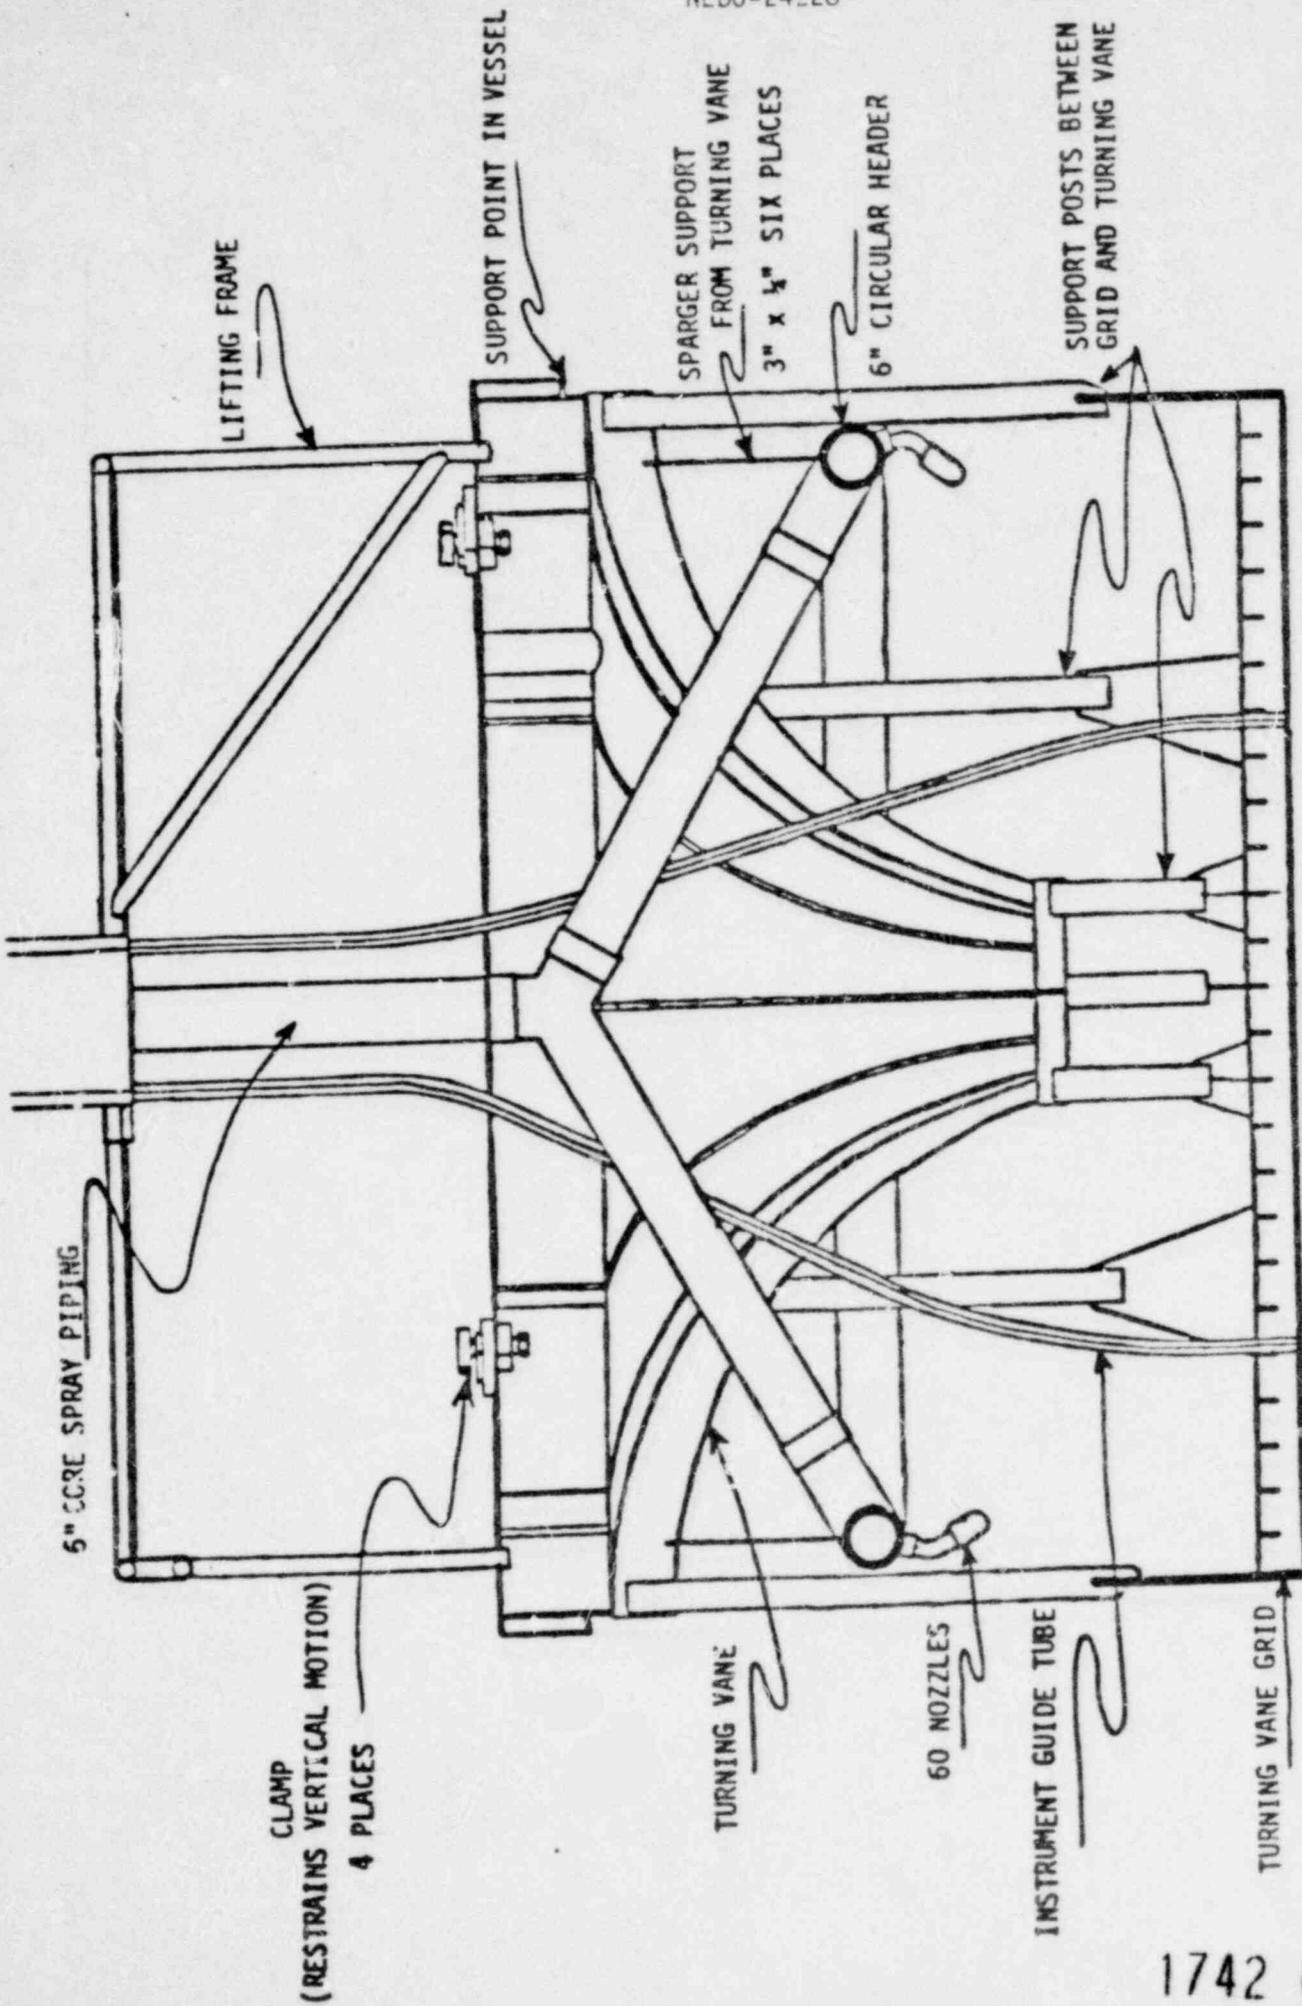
EXISTING DESIGN TURNING VANE ASSEMBLY
